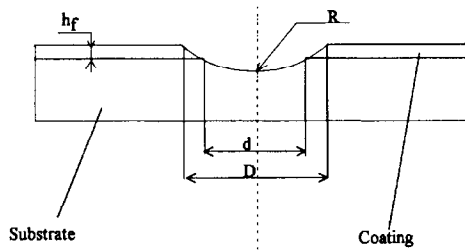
Schematic drawing of an eroded hole, showing the ball radius  $r$ , the inner diameter  $d$ , the outer diameter  $D$  and the coating thickness  $h_f$ .
